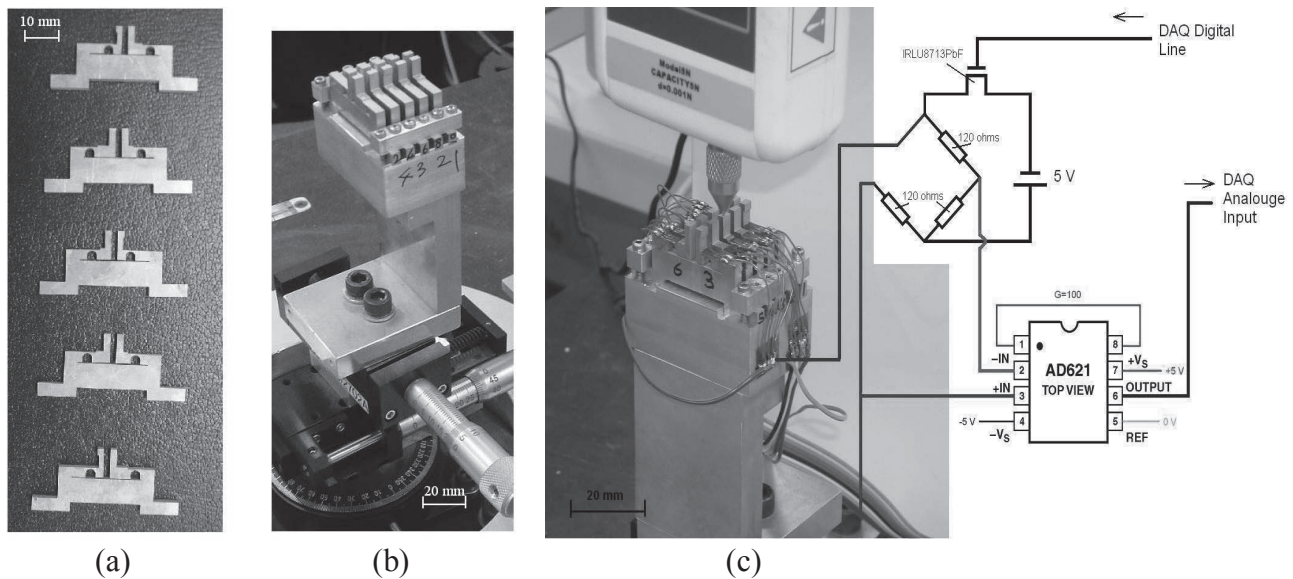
(a) Tactile sensing elements fabricated by wire-cut process; (b) The whole mechanical set-up after its fabrication and assembly; (c) Macro-tactile set-up after bonding of strain gauges on sensing elements and soldering of connection wires, together with schematic presentation of read-out circuit
